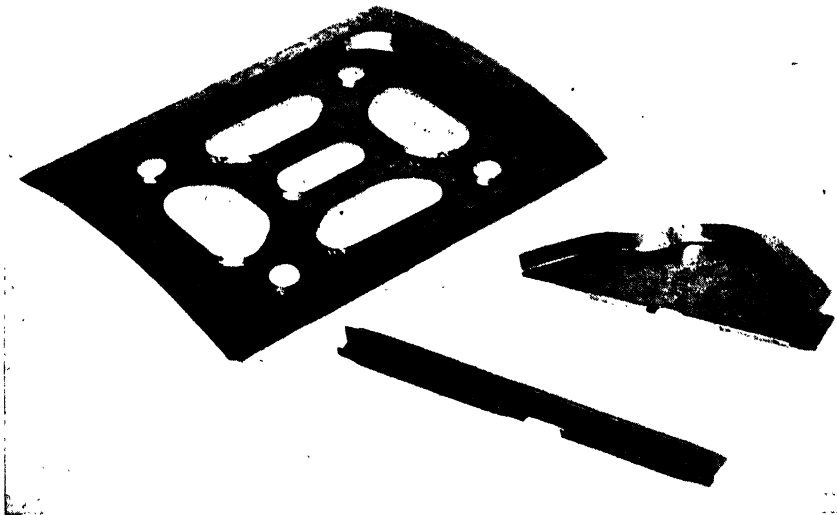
Radio panel and gussets made of Alcoa aluminum alloy S-014 (0.064 in. gage), showing difficult shallow drawing. These parts were stamped without using soft-rubber draw rings, but they require a limited amount of hand peening. The openings through the panel were punched out before the blank was formed.
